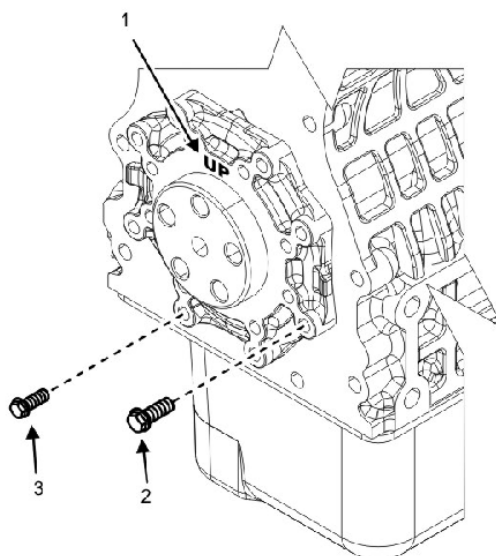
Crankcase Rear Bearing Case Cover - Removal.
